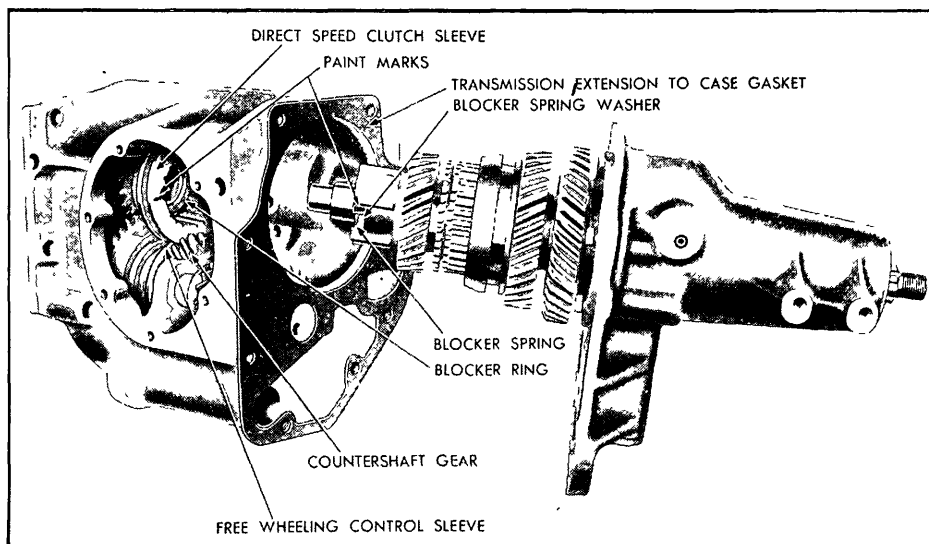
Mainshaft and extension housing removed, 1946-52 automatic transmission
